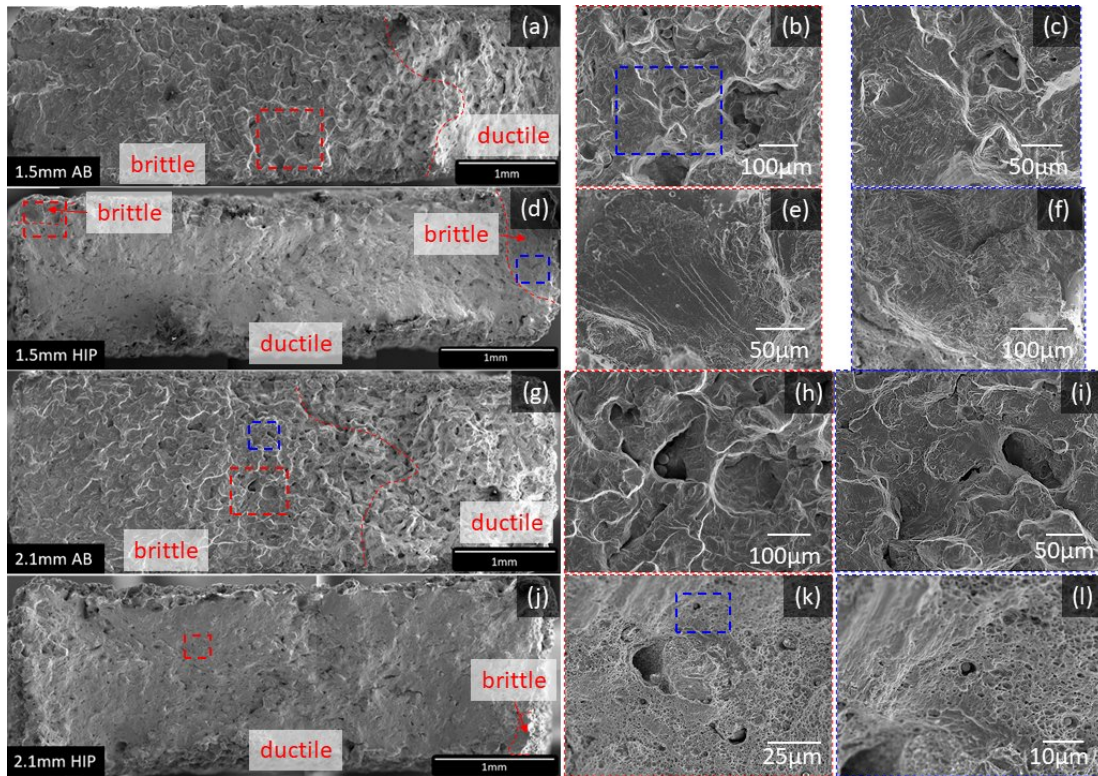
Fracture surface for 1.5mm and 2.1mm specimens in both as-built and HIP'd conditions. (a) shows the 1.5mm as-built fracture surface with a zoomed in version at (b) showing unmelted powder and a further zoomed in image (c) showing striation marks. Part (d) shows the 1.5mm HIP'd fracture surface with zoomed in sections at (e) and (f) to show brittle fracture starting at the corners of the specimen. Part (g) shows the 2.1mm as-built fracture surface with two zoomed in locations at (h) and (i) to show unmelted powder and striation marks, respectively. Part (j) shows the 2.1mm HIP'd fracture surface with a zoomed in version (k) showing a defect surrounded by ductile dimples and a further zoomed in image (l) to show a debonded particle from the matrix.
